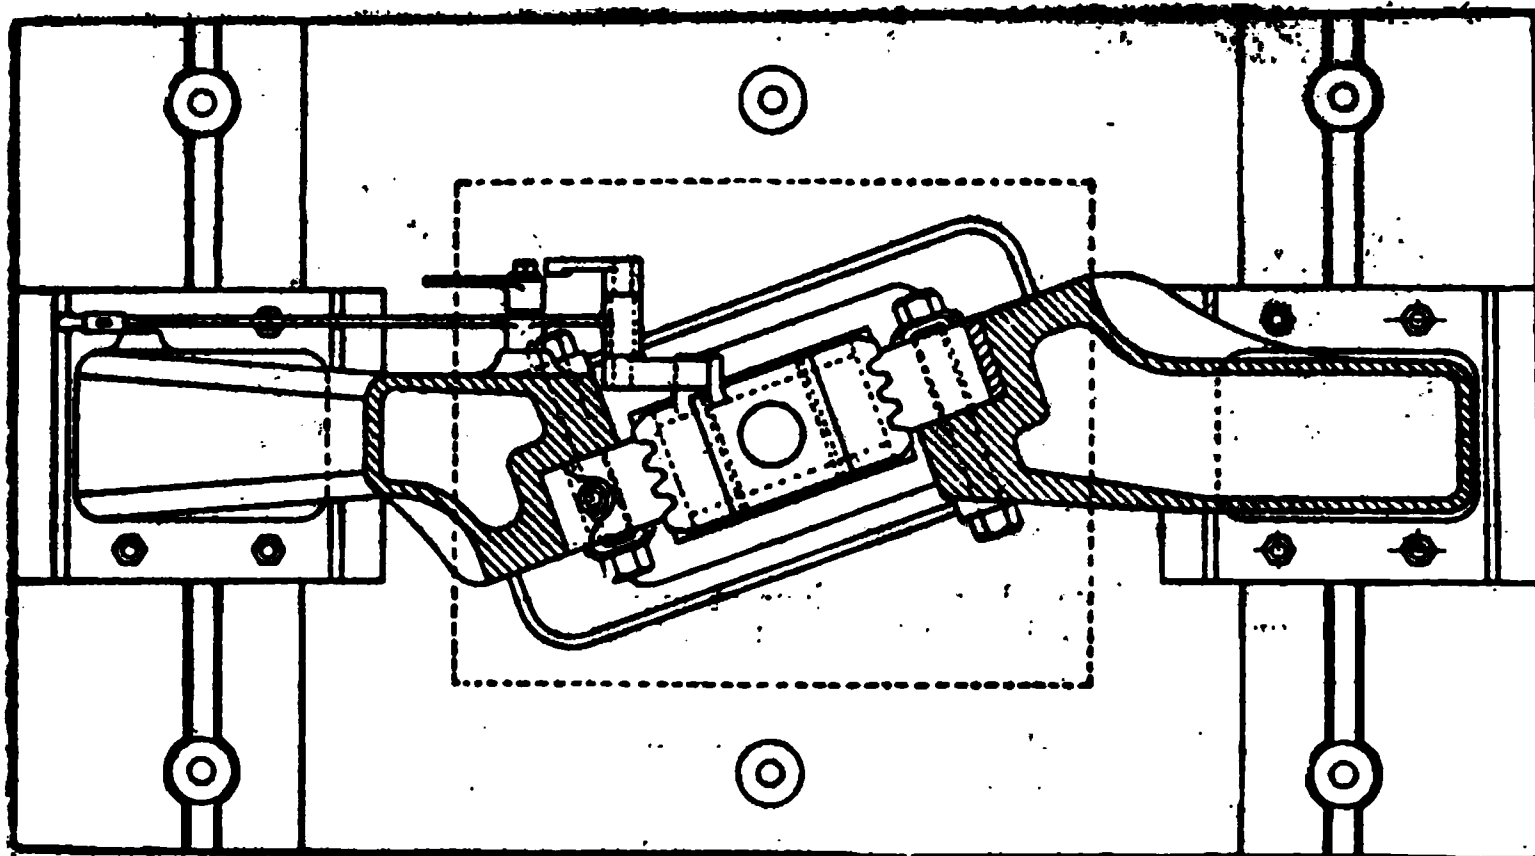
,625.—Cross section of small double frame hammer, showing the hammer head set at an angle with the columns, a construction allowing the use of straight line dies without twisted faces, and making the hammer suitable for general blacksmith work.
